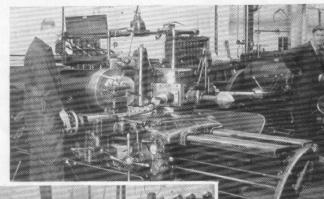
Tubes up to 4 in. inside dia. and bolts up to 3 in. dia. are screwed automatically on this No. 4-3 'Kenco' Screwing Machine.
